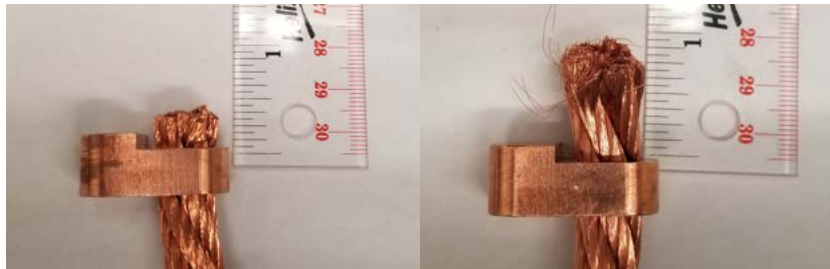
(left appropriate level of excess copper braid for a compact weld finish. (right) After the first connector is welded, the second end can be trimmed to length. Note the $1/8$ " offset from the weld surface to the thermal connection surface.
